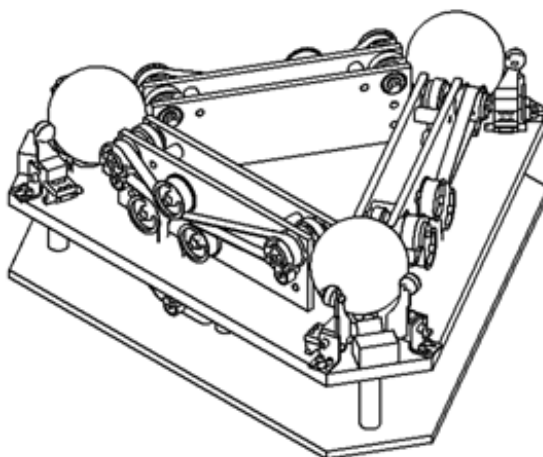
Omnidirectional robot with ball wheel drive mechanism[21]
